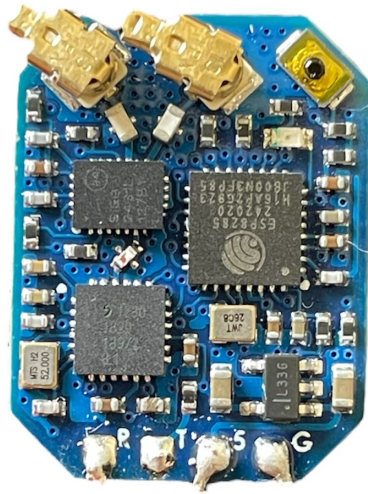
The Receiver board. Notice the pins in the bottom, which were already soldered when this picture was taken.
